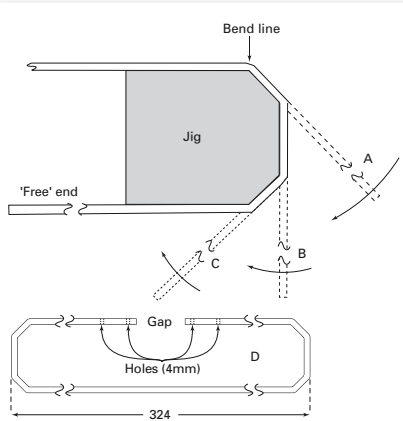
Using the bending jig to carefully bend the strip into the correct shape.
